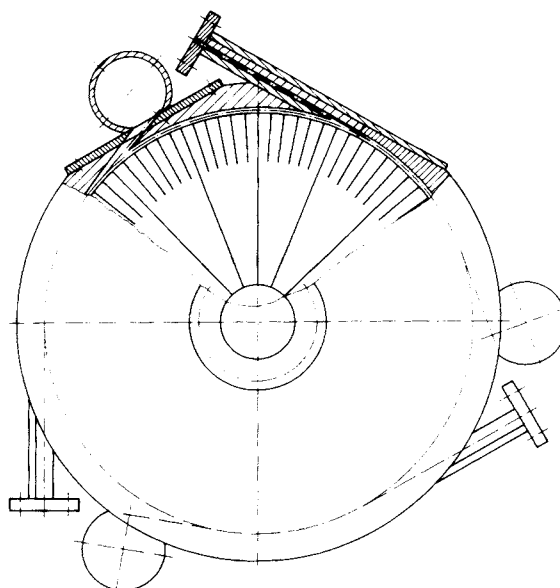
Top view of the Clausthal Impeller Wheel Classifier
